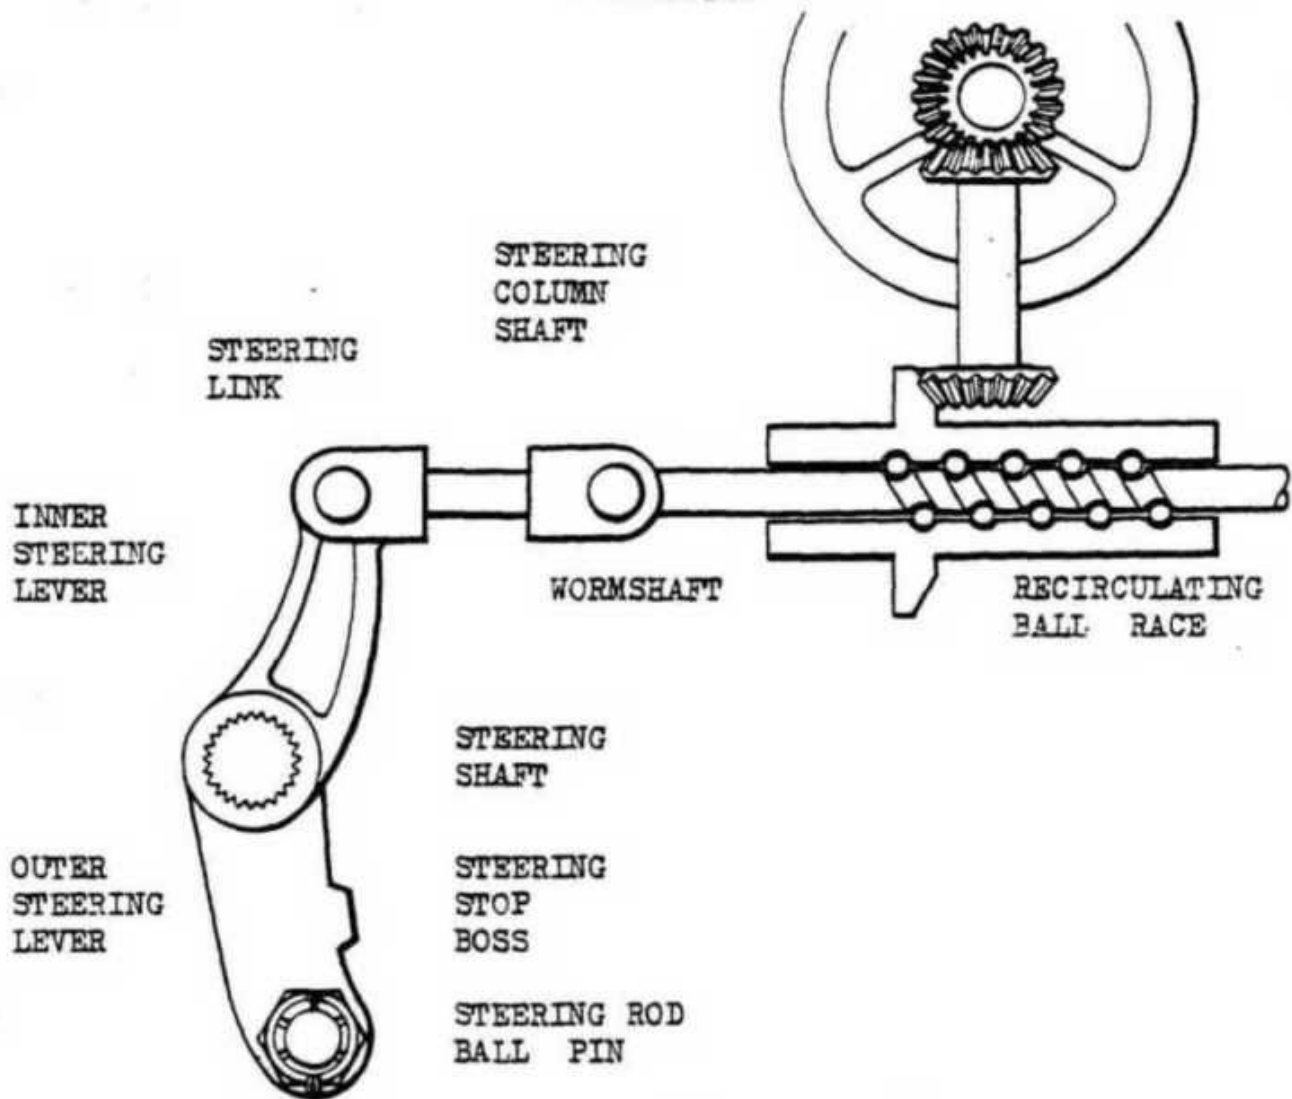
STEERING LAYOUT (FRONT VIEW)
